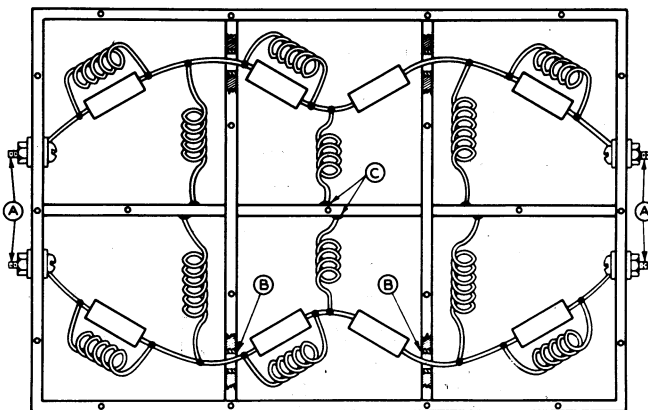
Top view showing the arrangement of the parts in a three-section, series-derived, low-pass filter. The top and bottom plates of the shield box are not shown. When these plates are bolted into position, the shield box completely encloses the components. The shield box should be bolted to the transmitter cabinet where the transmission line emerges.
